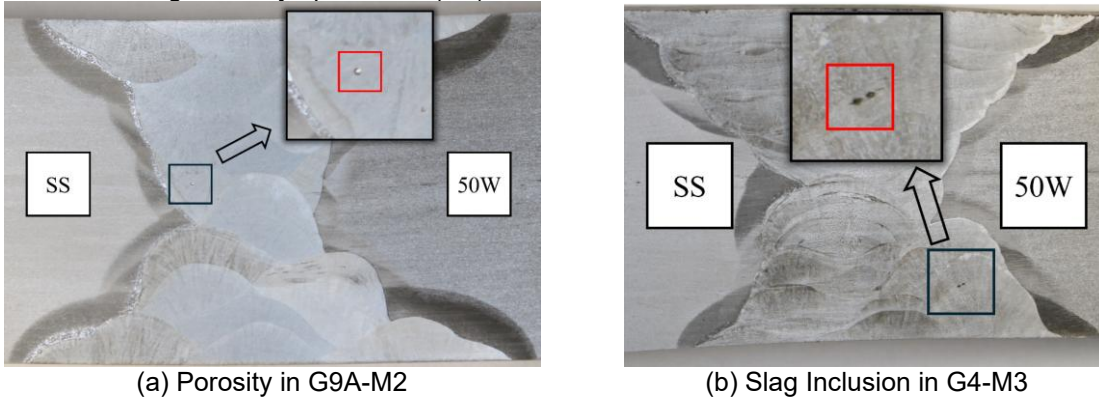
Representative discontinuities observed in welded plate specimens: (a) porosity in G9A-M2 and (b) slag inclusion in G4-M3
